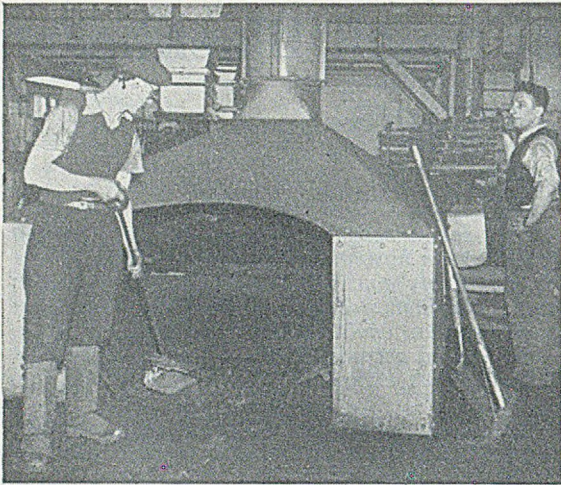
Shake-out Station with the Pallet-type Mould Conveyor at the Rear. Bottom Boards are returned on a Roller Conveyor.
